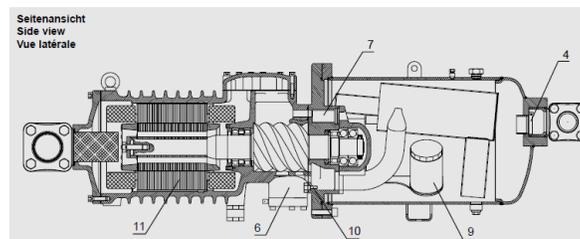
Cross-section view of LS or HS screw compressor (4: check valve, 6:Vi-control, 7:differential pressure relief valve, 9: oil filter, 10: discharge temp. control device, 11: built-in motor) (Bitzer Kühlmaschinenbau GmbH)
